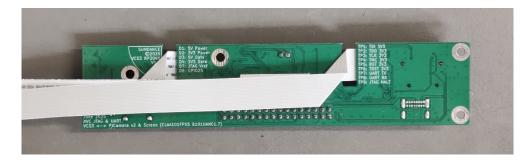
Routing for FFCs. Two sequential bends used to avoid the silver mounting holes
